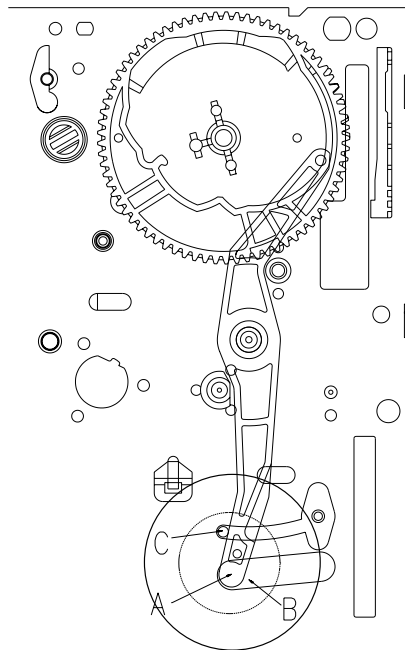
DATUM POSITION OF RELAY LEVER & CAM GEAR
